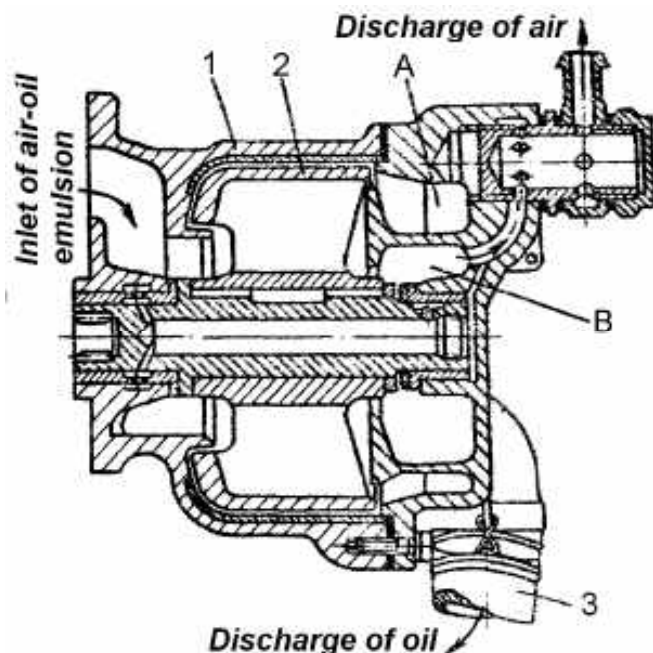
Centrifugal de-aerator: 1 - casing; 2 - impeller;
